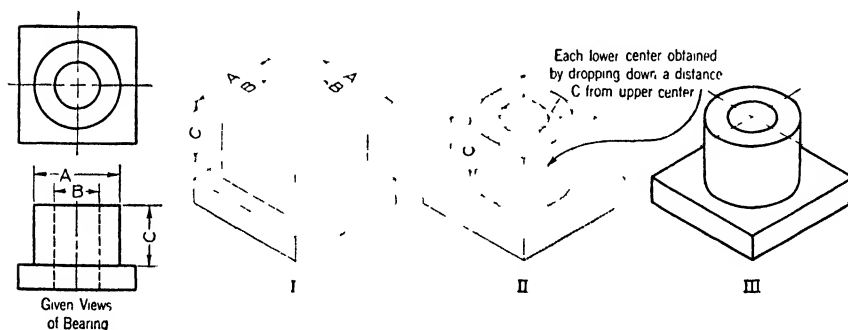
ISOMETRIC DRAWING OF A BEARING
